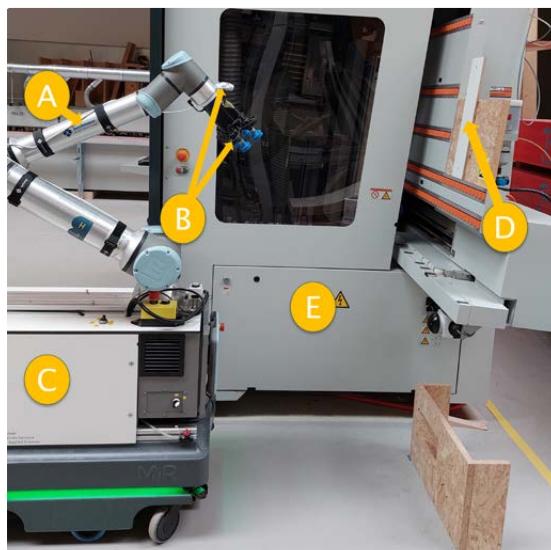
Cobot (A) with a camera and a gripper (B) on a mobile platform (C) after loading a part (D) on a CNC machine (E)
